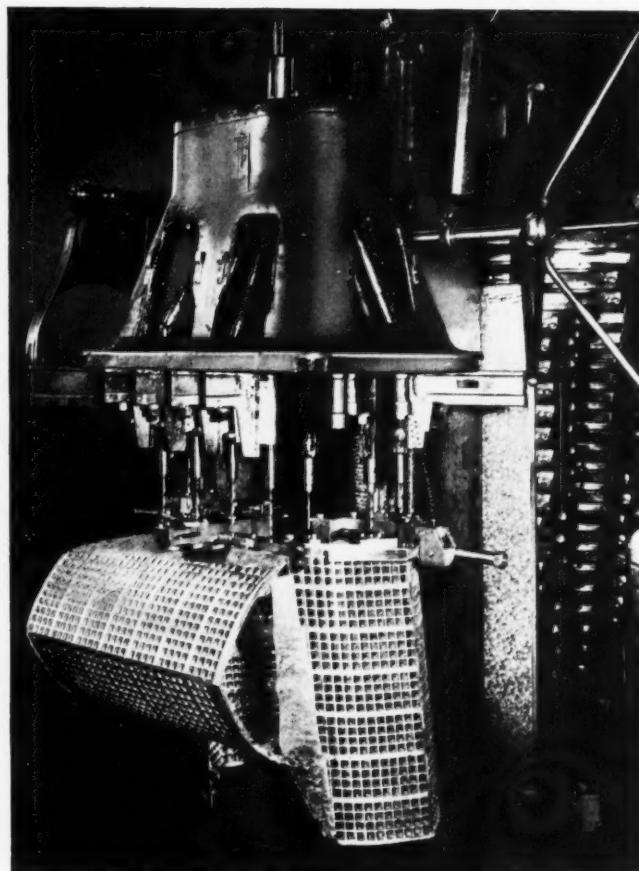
Drilling Sixteen Holes in the Sides and End Lugs of Die-cast Grilles
